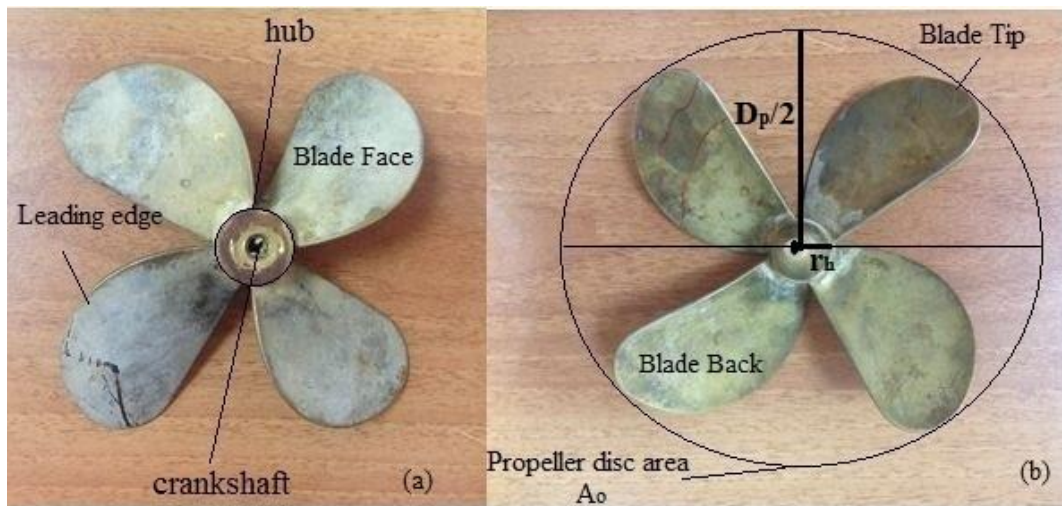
View of the propeller a) back view b) face view (aft side)
